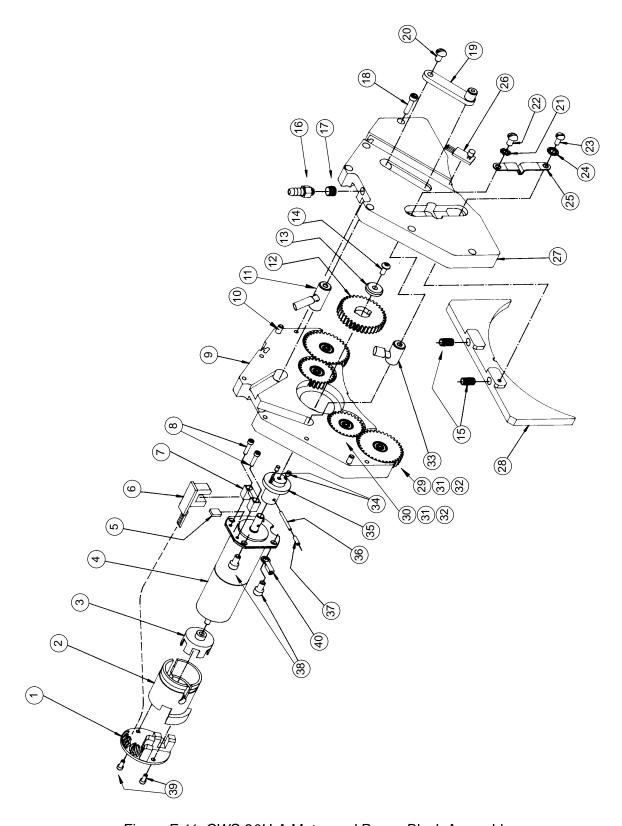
CWS-20H-A Motor and Power Block Assembly
